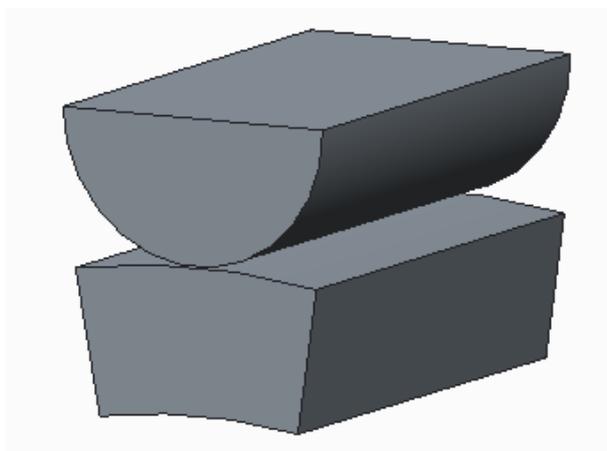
Single contact of heavily stressed equivalent cylindrical roller bearing between roller and inner race
